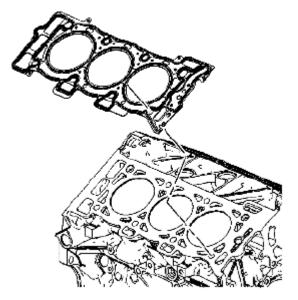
Identifying Cylinder Head Gasket Courtesy of SUZUKI OF AMERICA CORP.
